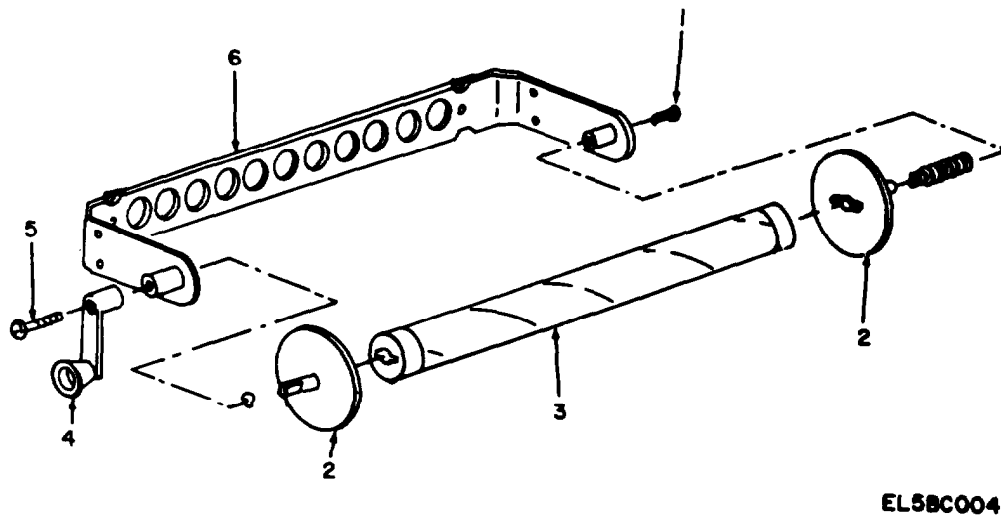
Projector, Overhead, Still Picture Ph-637D/PFP, Arm and Post Assembly.
